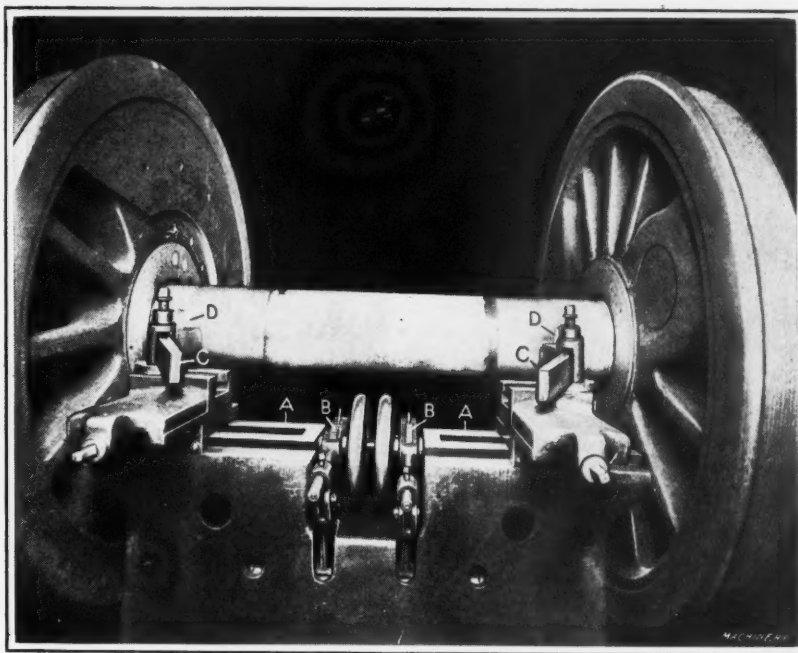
Burnishing the Journals of a Locomotive Driving Axle after re-turning
